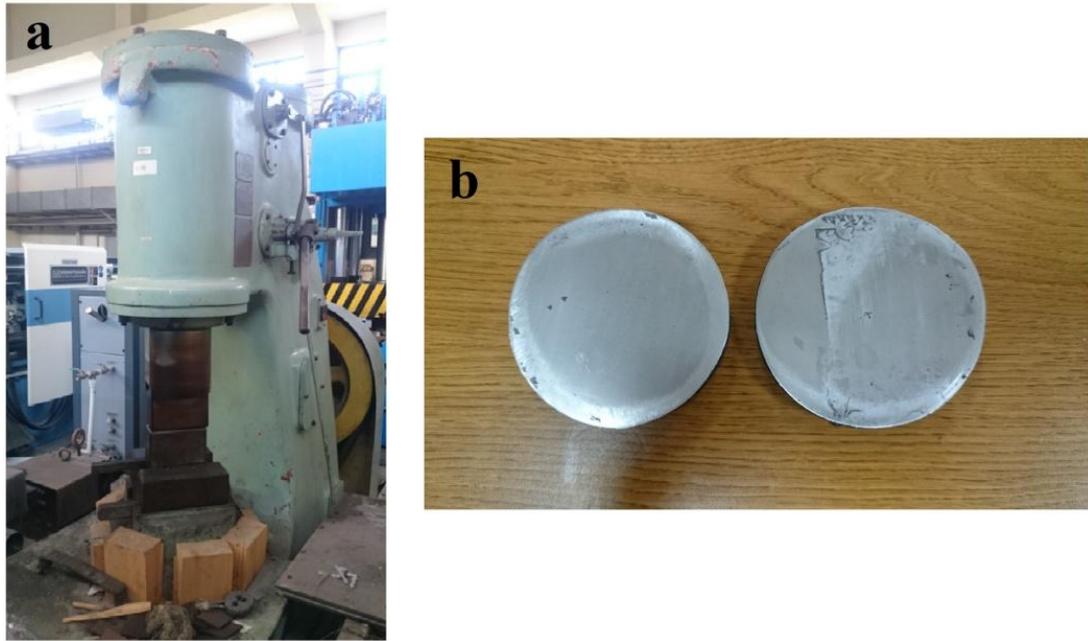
(a) Forging machine and (b) hot forged 7075 and 7085 aluminum discs
